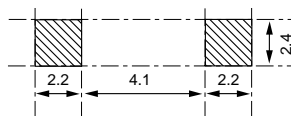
5ASM - Recommended Solder Pad Layout - Top view
